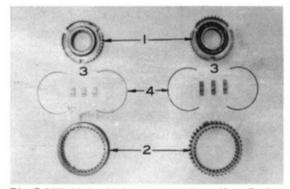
Hub, Hub Sleeve, Key, Key Spring Inspection
